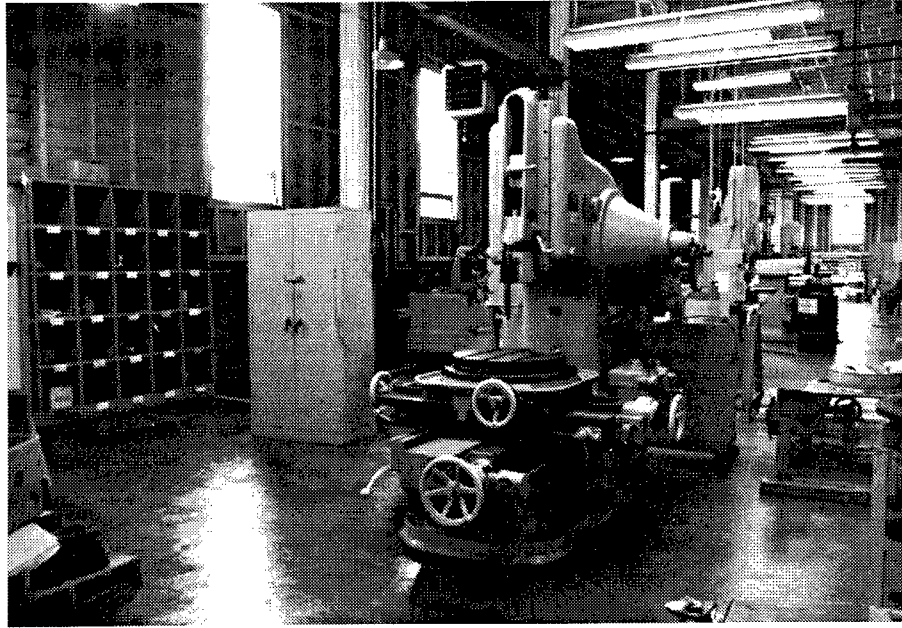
Building 100: Vertical Shaper/Metal Shaper, HOL 8617, manufactured by Morey Machinery Co., New York.
